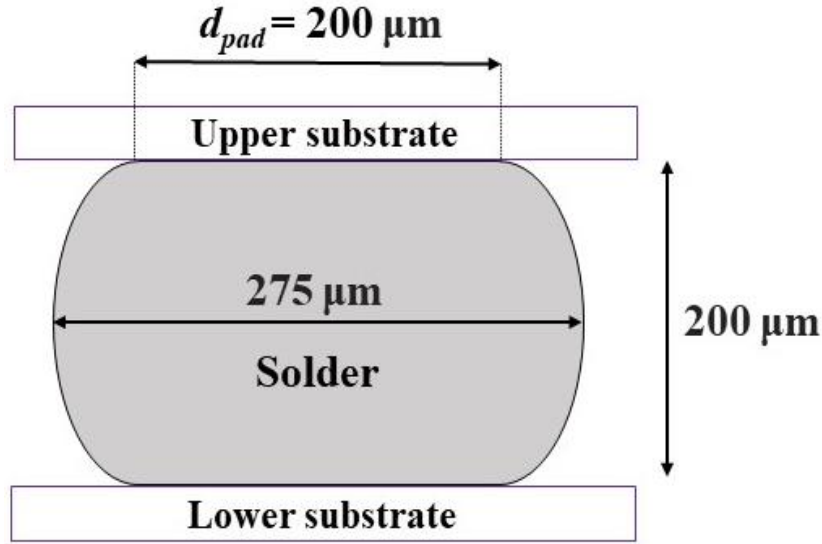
Design requirements for selection of solder joint and pad size. Typical geometry of test vehicle for solder joint diameter of  $250 \mu\text{m}$  after reflow.
